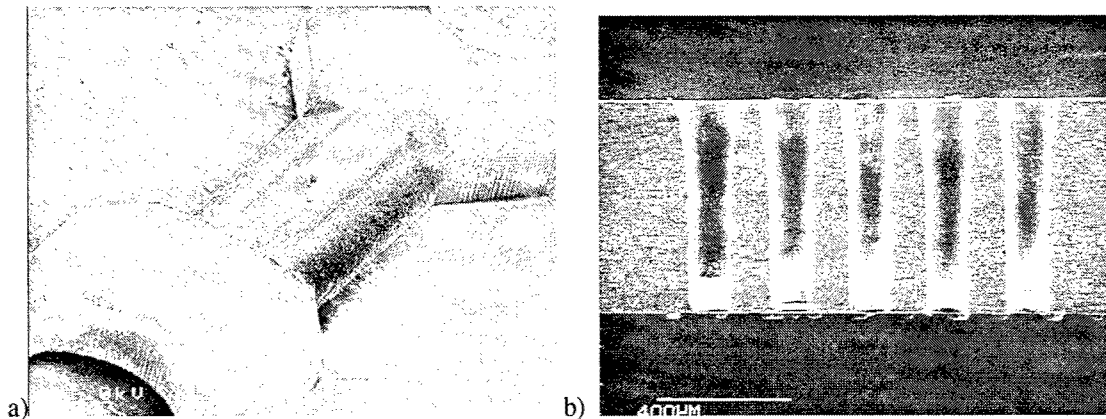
a) Ceramic laser diode mount & b) ceramic fibre terminator (cross-section) machined using visible CVL beam.
